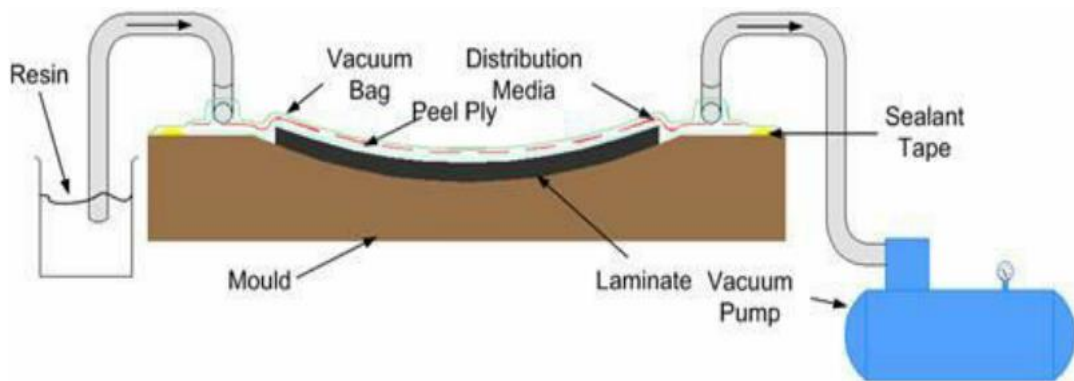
Vacuum assisted resin transfer moulding [6]
